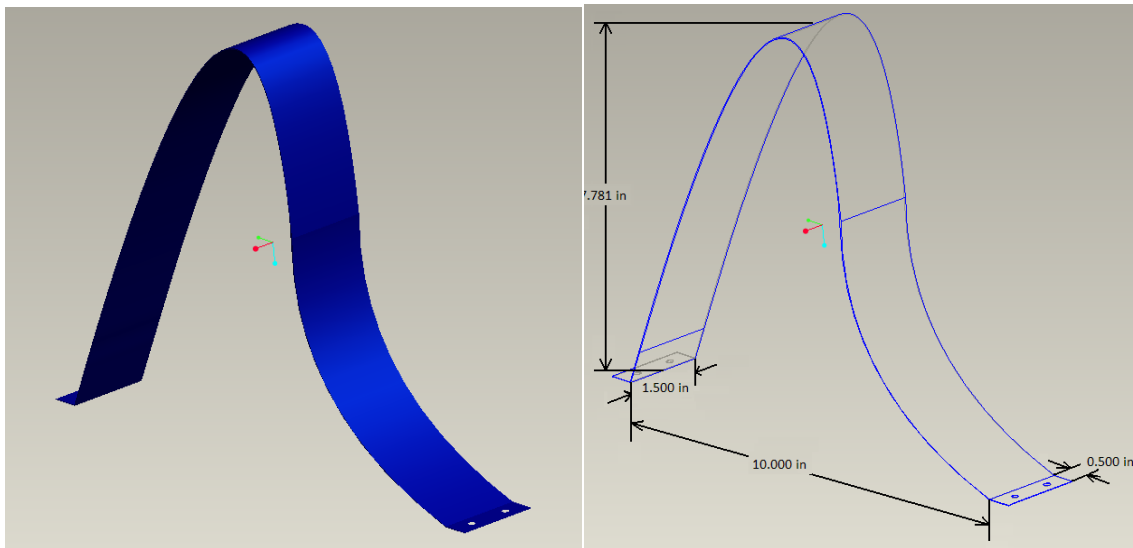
Pro-Engineering CAD model on Aluminum Strap 1 showing its dimensions
